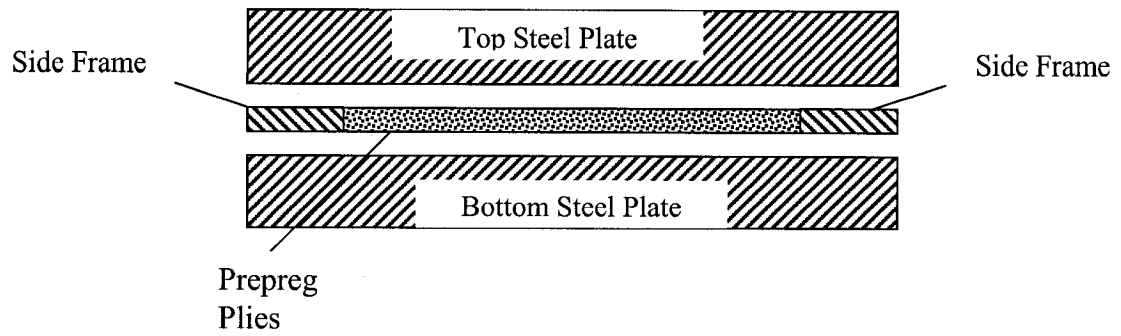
Schematic of the cross-section of the Steel frame mold with prepreg plies in between.
